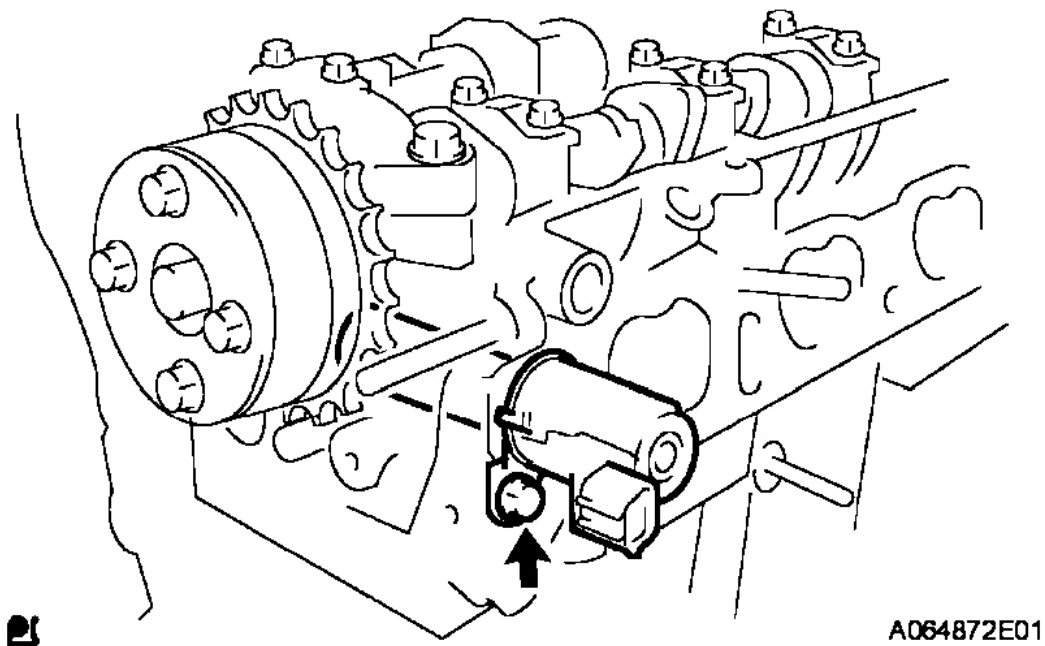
Installing Camshaft Timing Oil Control Valve Assembly
